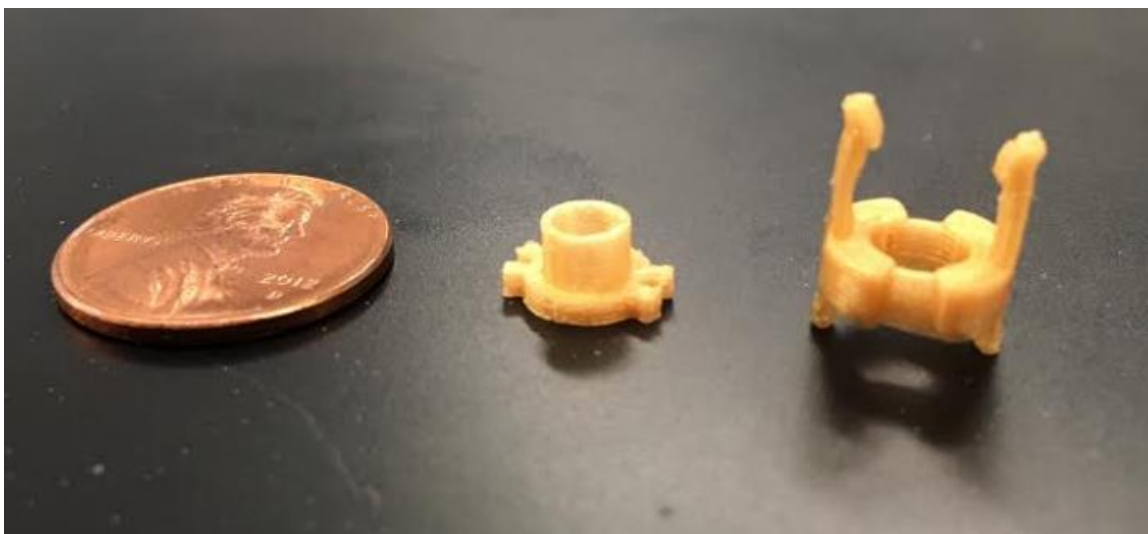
PLA inner ring (left) and outer ring (right) fabricated using 3D printing.
